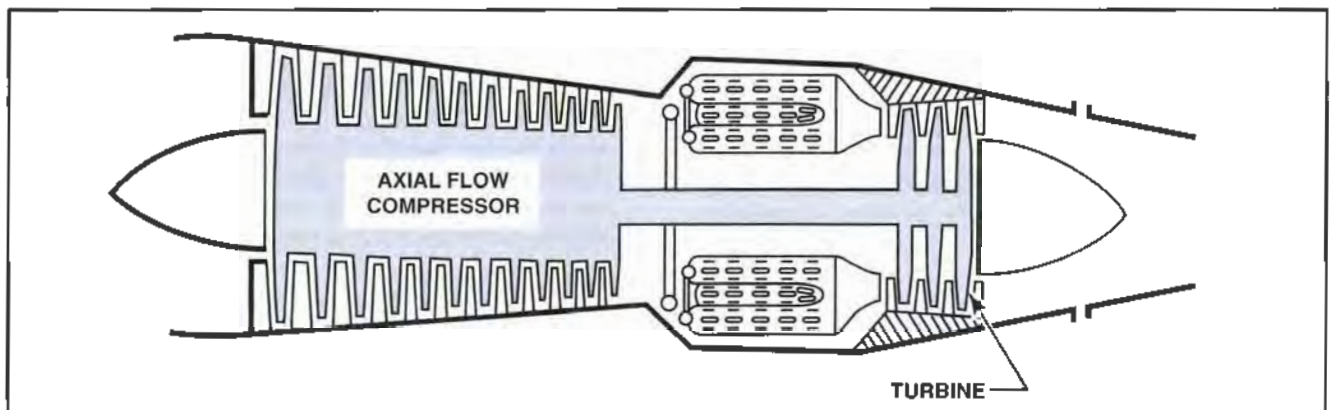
In a single-spool compressor, one compressor unit is connected to the turbine section by a shaft.
